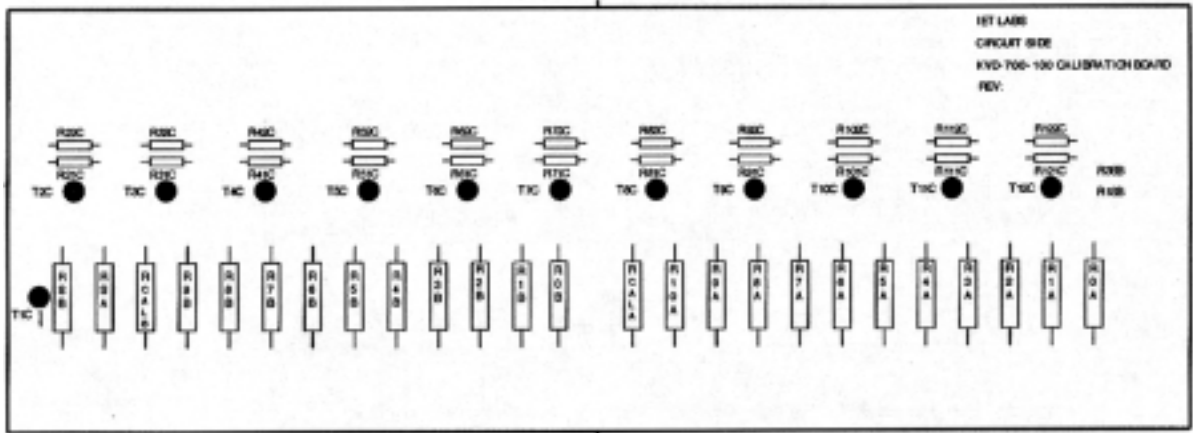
Replacement Parts List: Bottom View of Calibration PC Board
